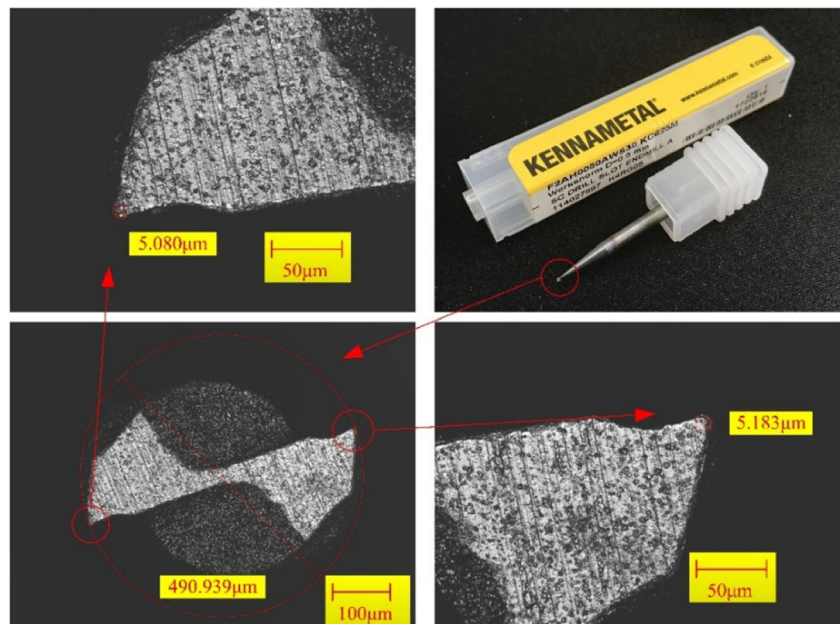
Optical zoom of micro-end milling cutter (KENAMETAL)
